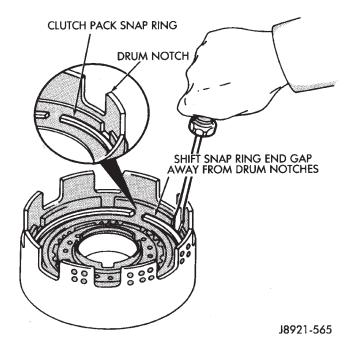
Adjusting Clutch Pack Snap Ring Position
